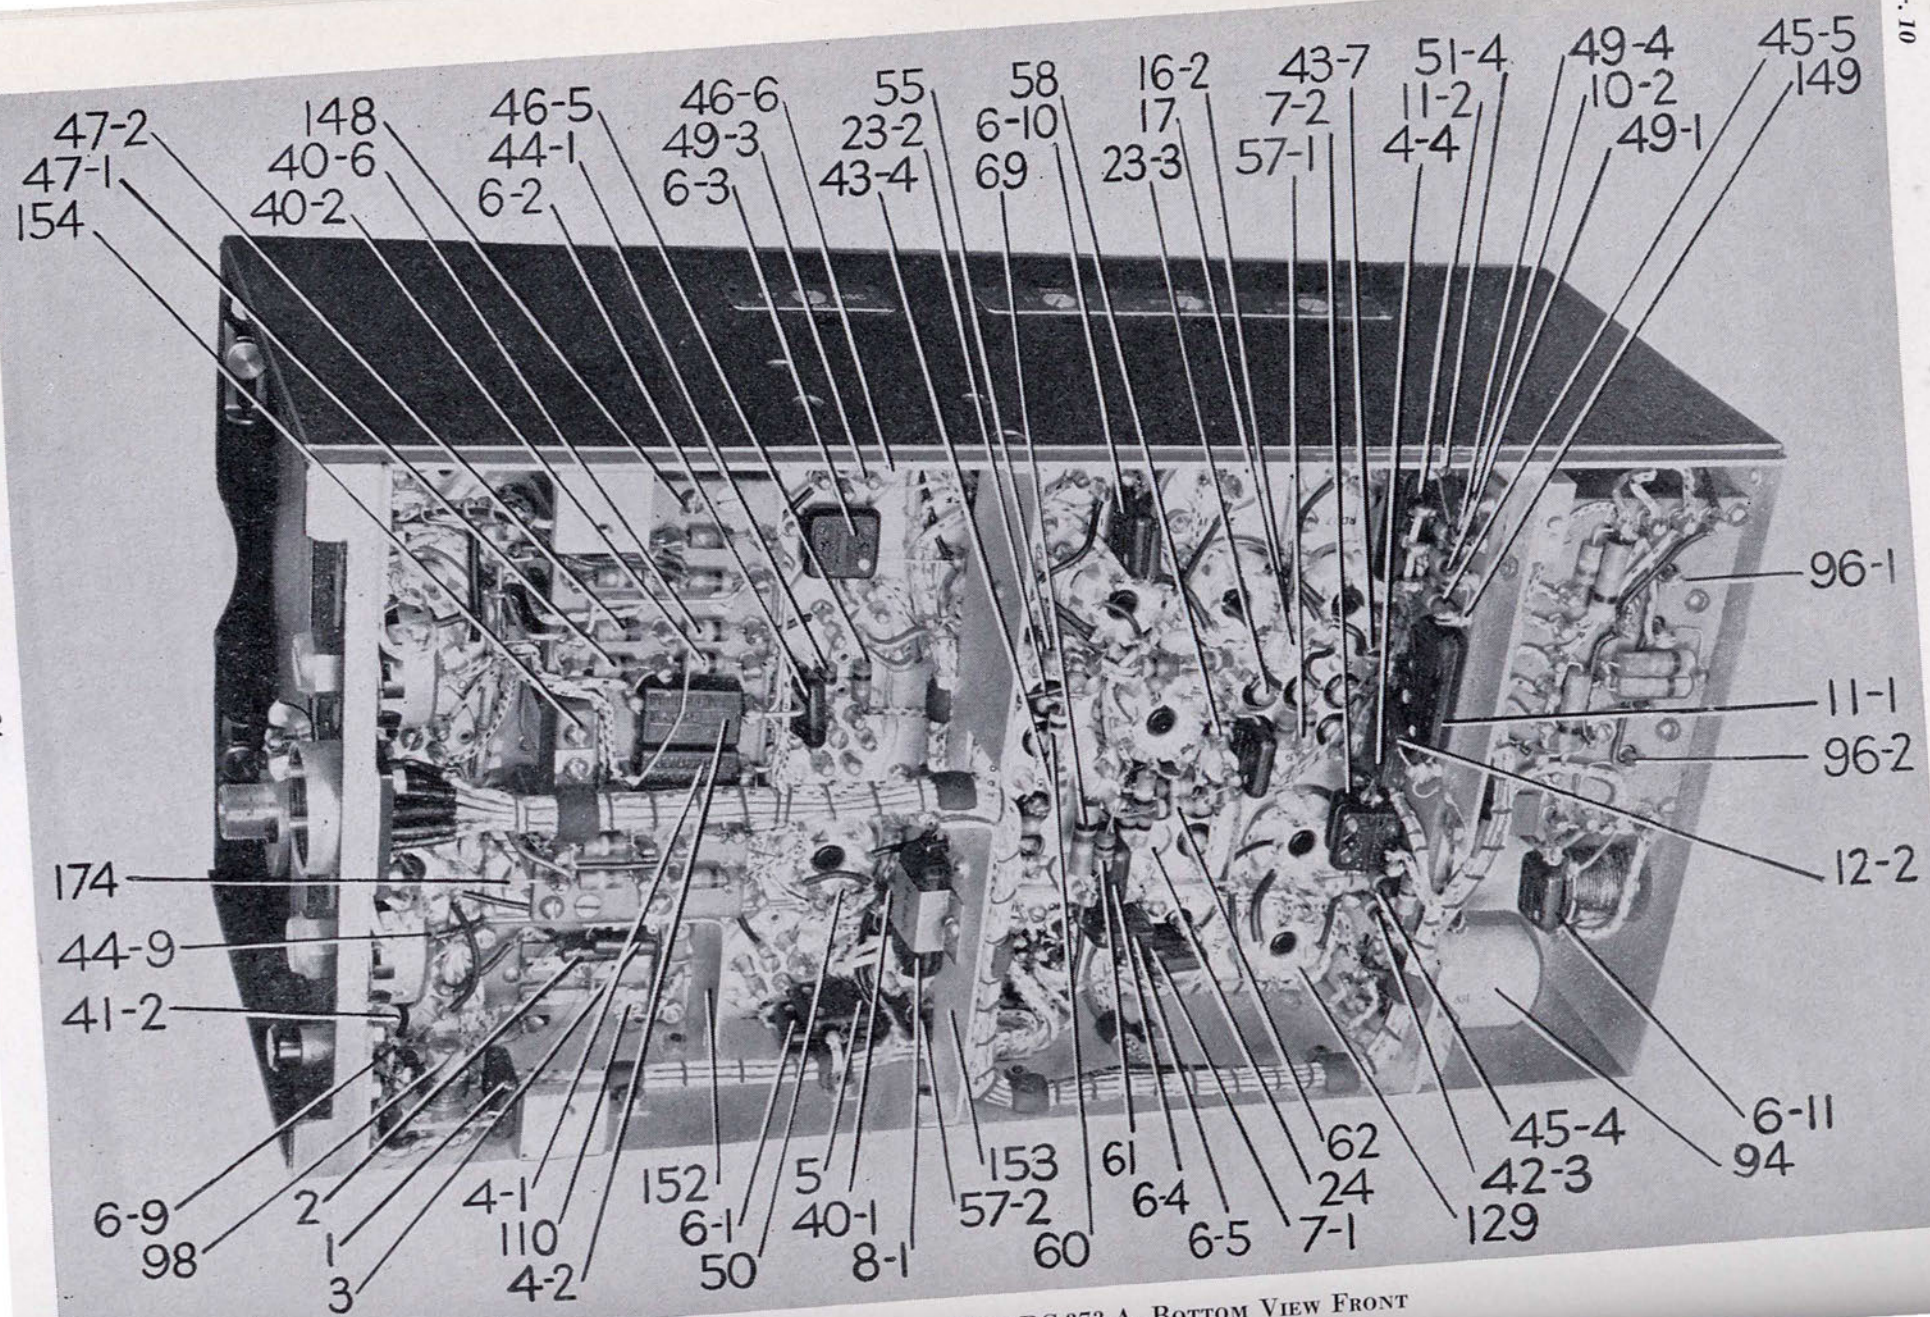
RADIO COMPASS UNIT BC-373-A, BOTTOM VIEW FRONT
